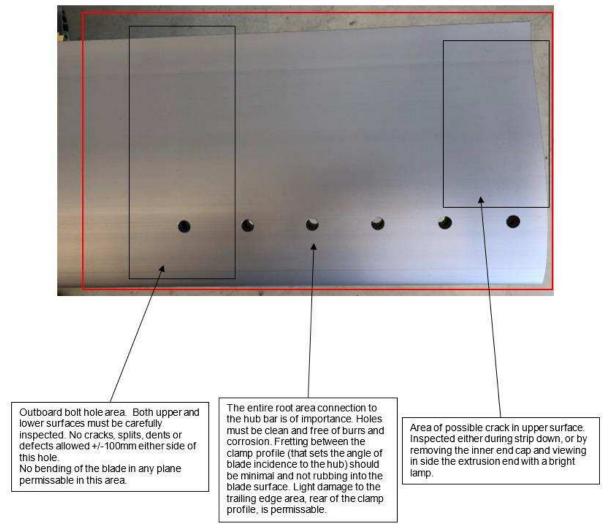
View of the tope side of the rotor root (RSII, 6-hole attachment)
